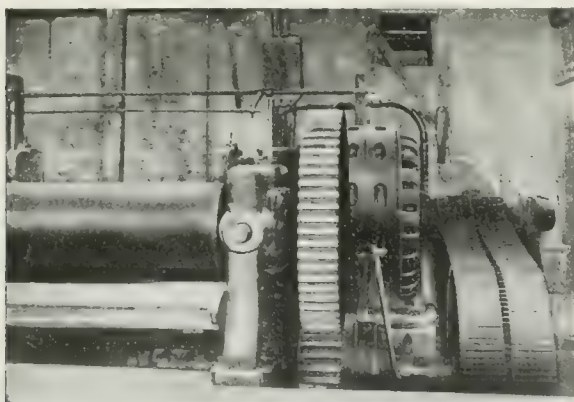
MOTOR-DRIVEN MILL SHOWING DOUBLE MORSE CHAIN DRIVE AND HEAVY MILL GEARING
